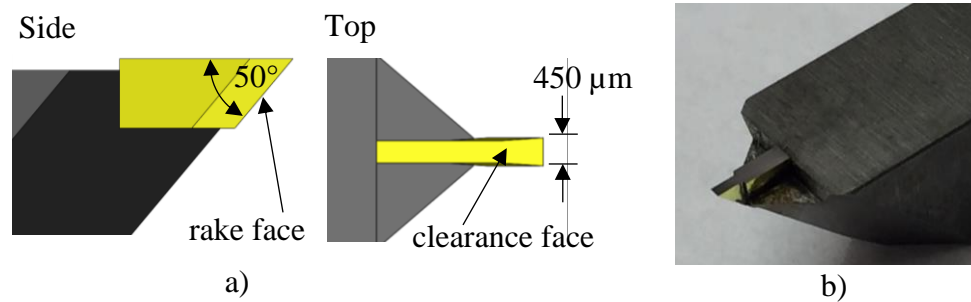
Geometry of USPIC tool: a) CAD model b) physical tool
